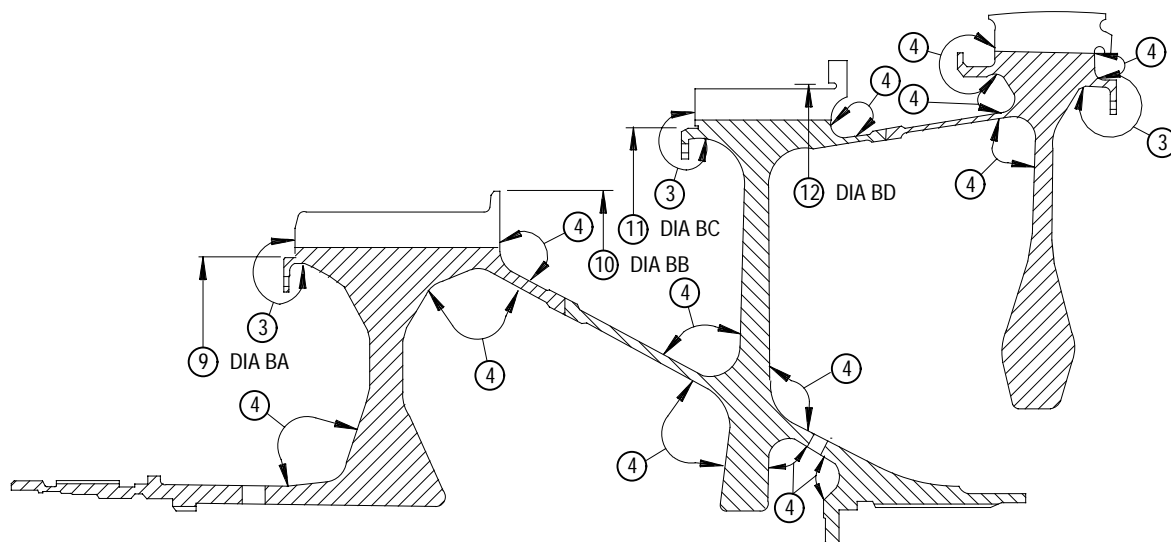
Front Compressor Drum Rotor Disk Assembly - Inspection (Sheet 1 of 5)
